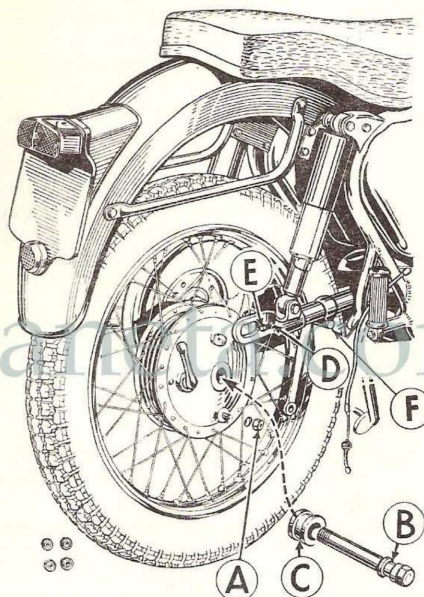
(c). Rear Wheel Removal and Rear Chain Adjustment
